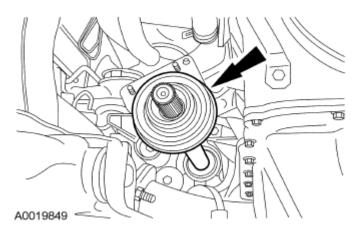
Locating Intermediate Shaft Bearing Retainer Nuts Courtesy of FORD MOTOR CO.
